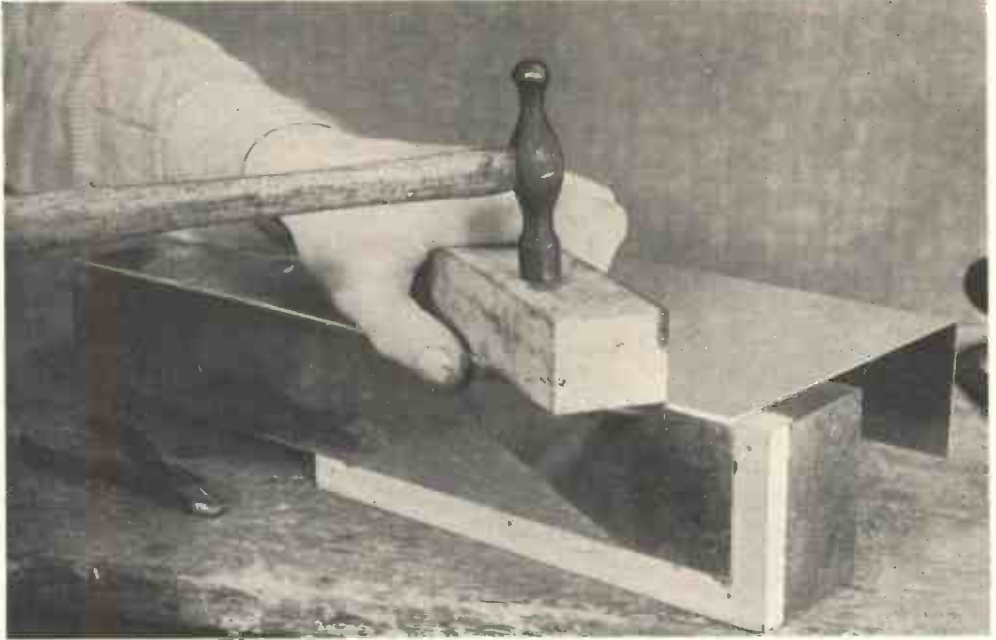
HAMMERING THE EDGES TO OBTAIN A SHARP BEND.
